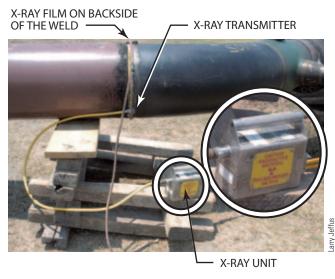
X-ray testing of pipe welds.
